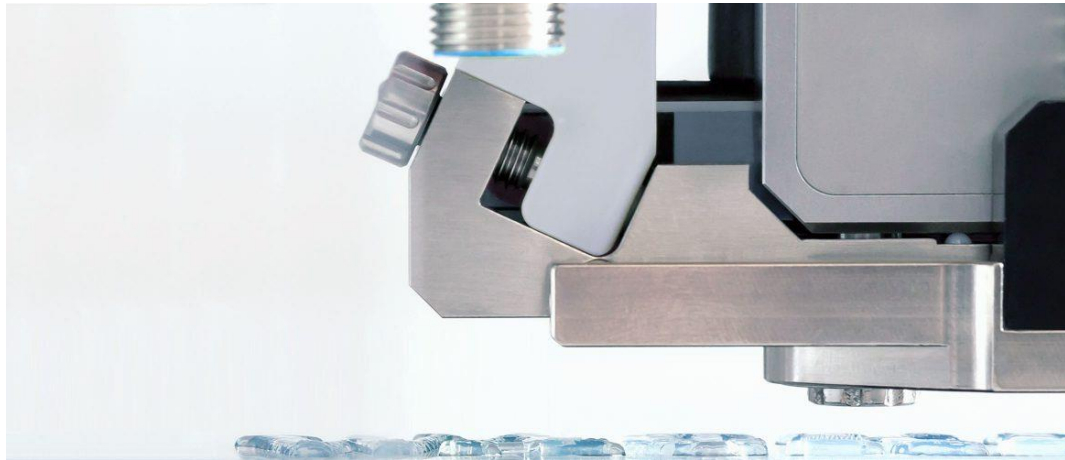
Powerjet Silicone Injection Molding Machine (Medical, n.d.)
